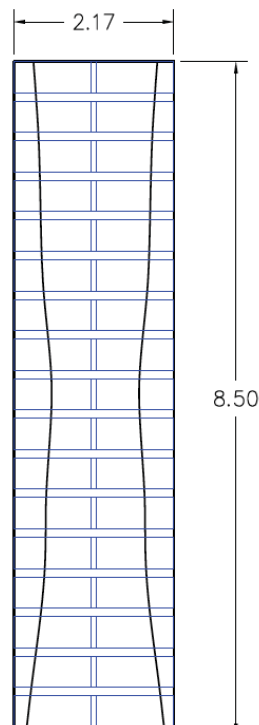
Detailed C block layout for Charpy Specimens. Figure derived from reference [2].
